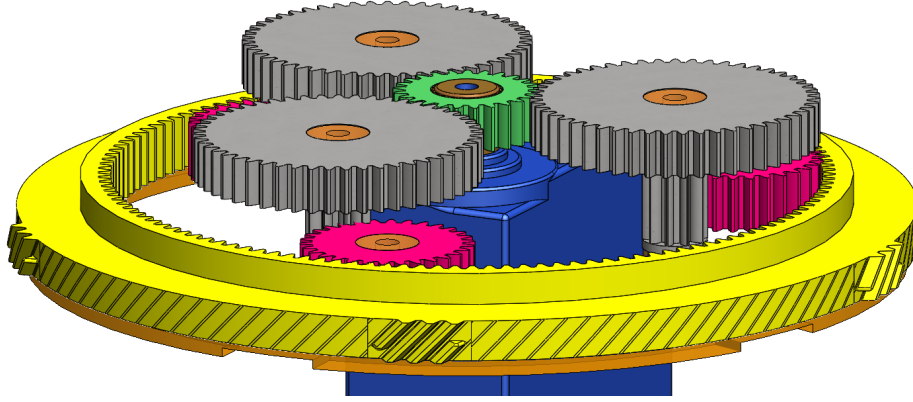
Epicyclic gearing-like mechanism actuated by the servo motor and used for door opening. Green - Drive wheel, Gray - First reduction stage, Pink - Second reduction stage, Yellow - Ring wheel for opening the doors, Orange - Bearings
